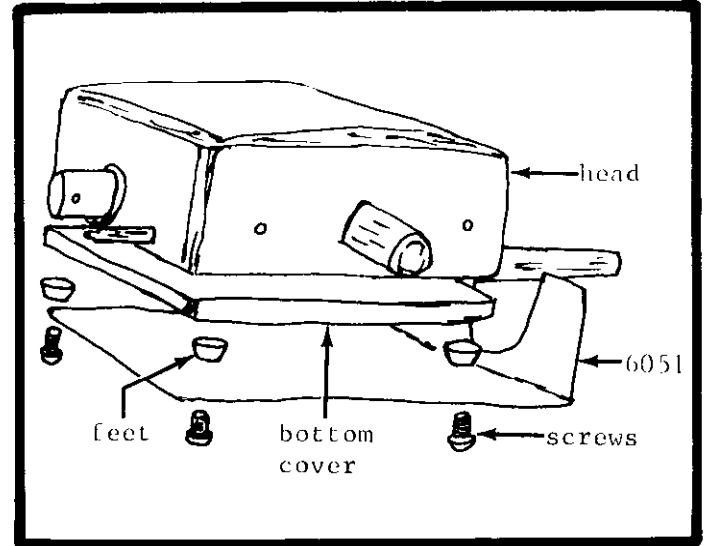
Keithley Model 605 Input Head and Model 6051 Mounting Bracket.
